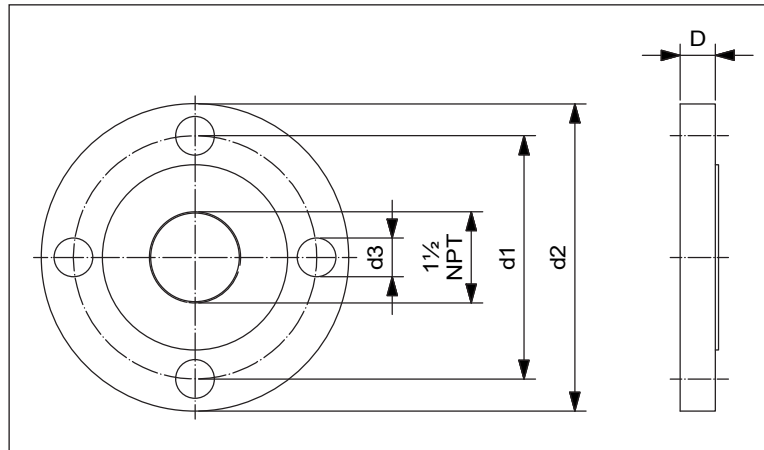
Dimensions of mounting flange (connection dimension in accordance with ANSI/ASME B16.5)
